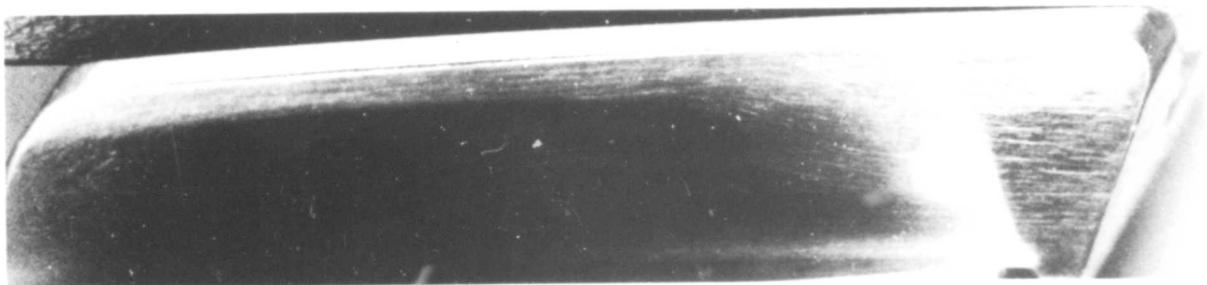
SK22023, Serial No. XC102, 9-Pitch, High-Contact-Ratio Helical Gear as Received
